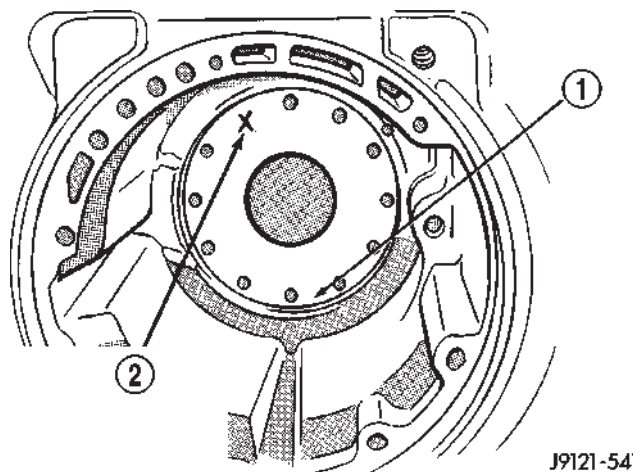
Location Of Blank Area In Clutch Cam Bolt Circle
